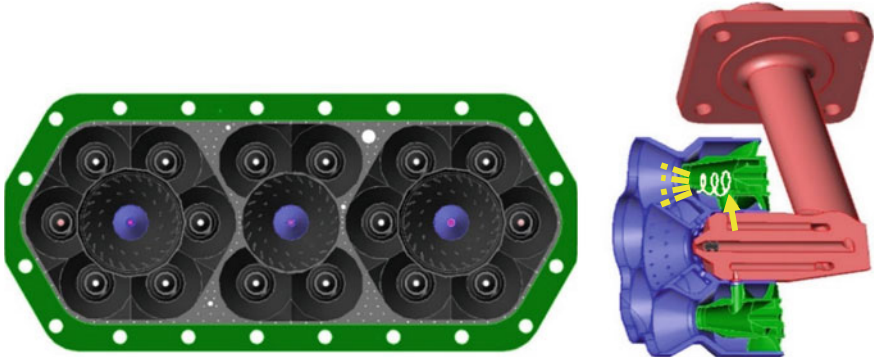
Dome-layout and CAD for a LDI-3 combustor with one five- and two seven-injection element arrays
